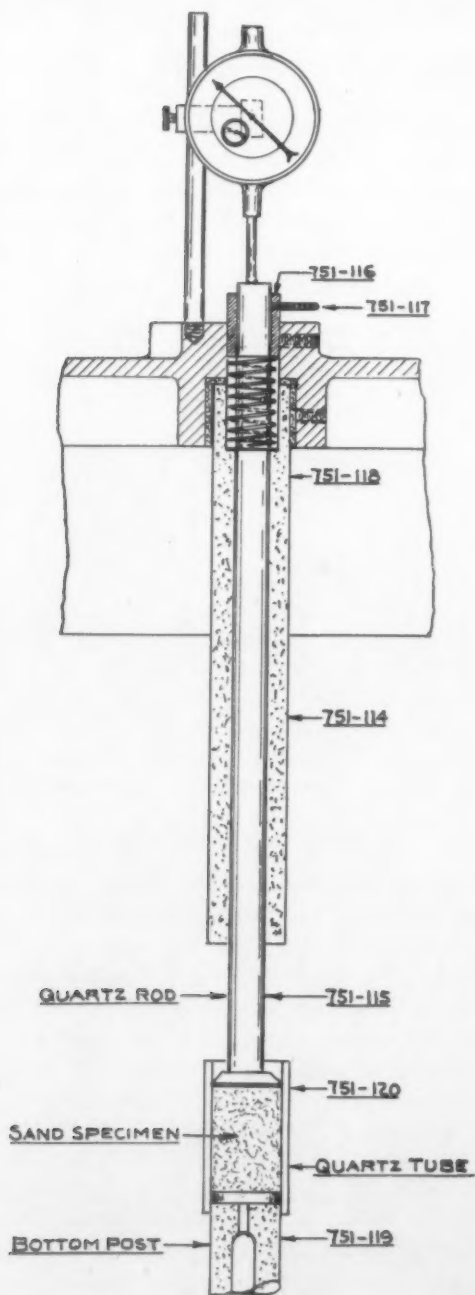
METHOD OF RAMMING SAND SPECIMEN AND MOUNTING FOR CONFINED EXPANSION TEST.
